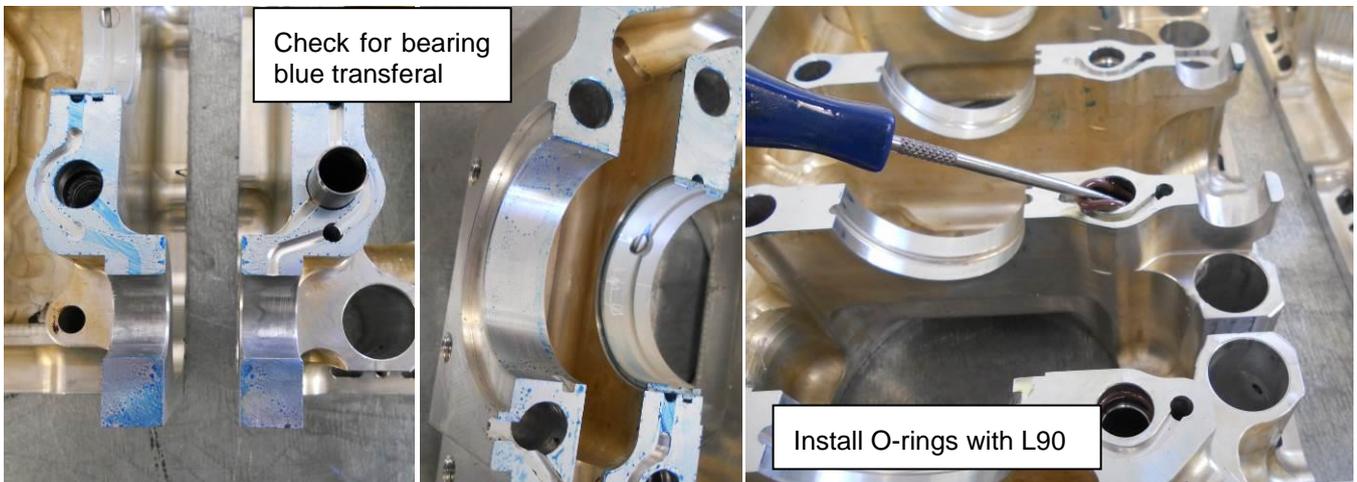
Bearing blue inspection and O-ring installation
